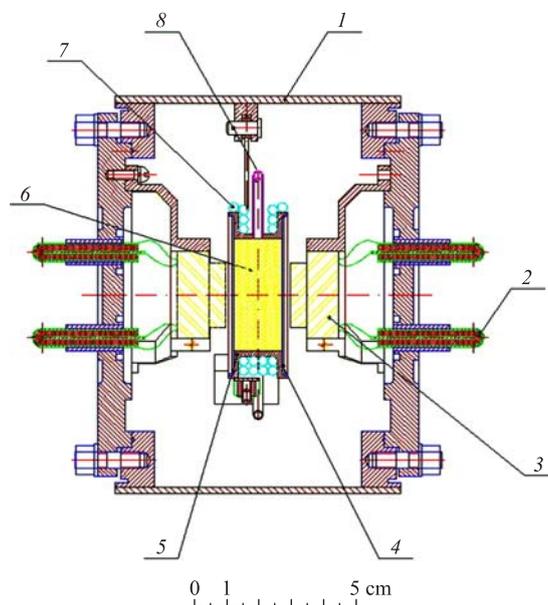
Evacuated chamber with a sample, elevation along diameter. 1 — cylindrical shell of the chamber; 2 — coaxial cables of displacement gauges (3); 4 — steel membrane; 5 — steel shell of a sample chamber; 6 — the sample (aluminium sponge filled with solid methane); 7 — coil of copper tube (heat exchanger); 8 — steel tube for filling and evacuation of methane and hydrogen gases
